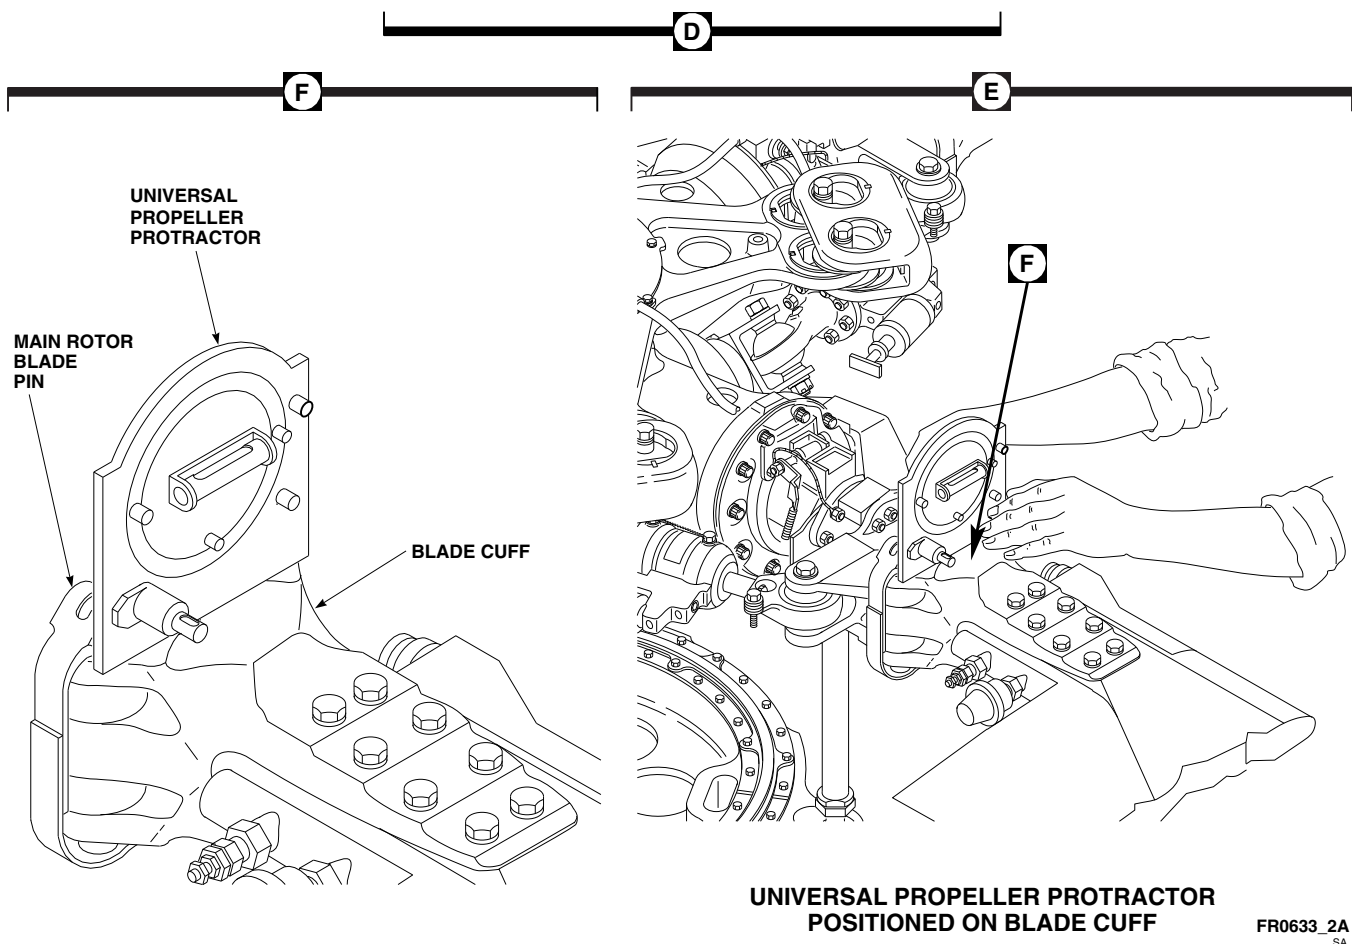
MEASURE BLADE ANGLE USING UNIVERSAL PROPELLER PROTRACTOR (SHEET 2 OF 2)
